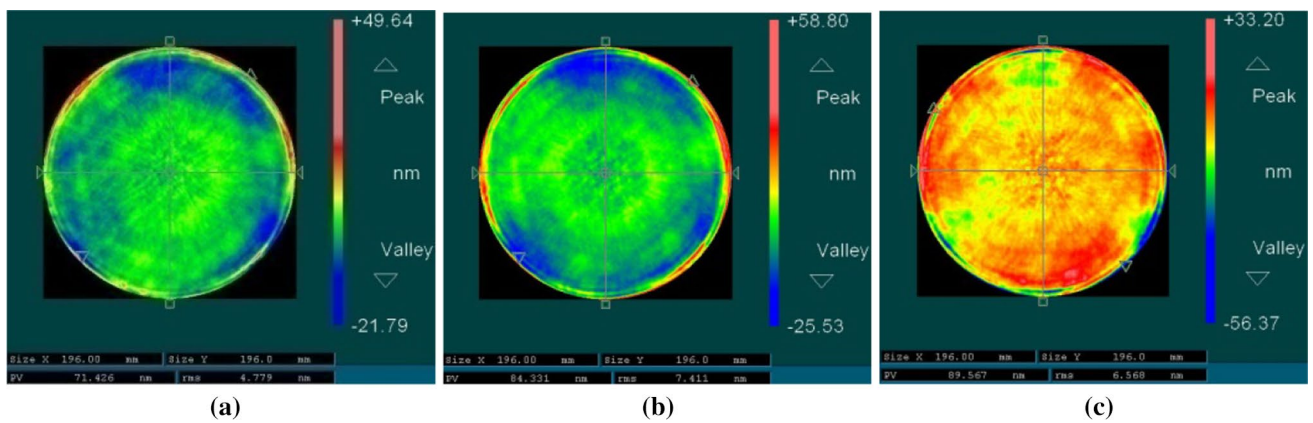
Edge controlling experiment on the steep concave sphere; a surface error before polishing; b surface error after polishing 3 μm uni-formly; c surface error of removal amount
